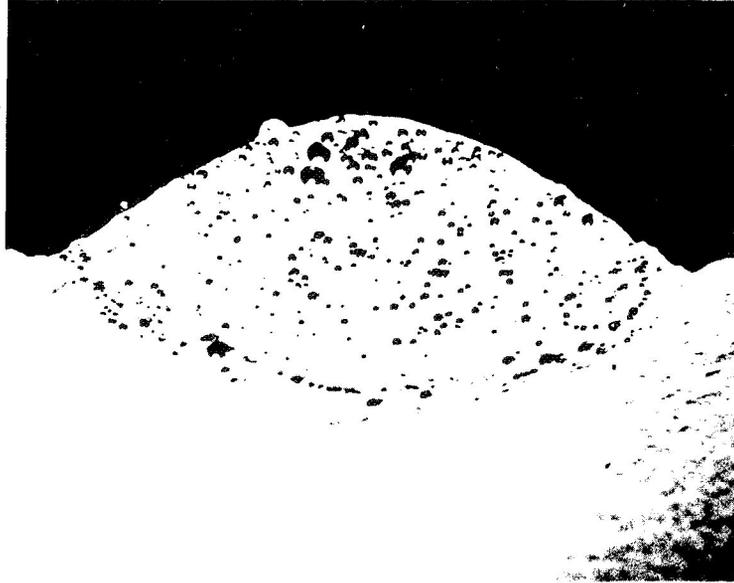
Electropolished Cross-Section of a Bead-On-Plate MIG-Deposited Weld in Type-3003 Aluminum Plate, 10X
